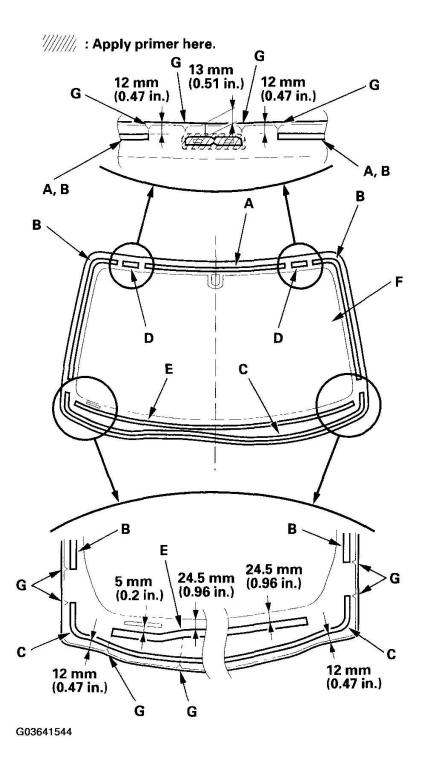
Attaching Clips With Adhesive Tape B And Dashboard Seal To Inside Face Of Windshield
